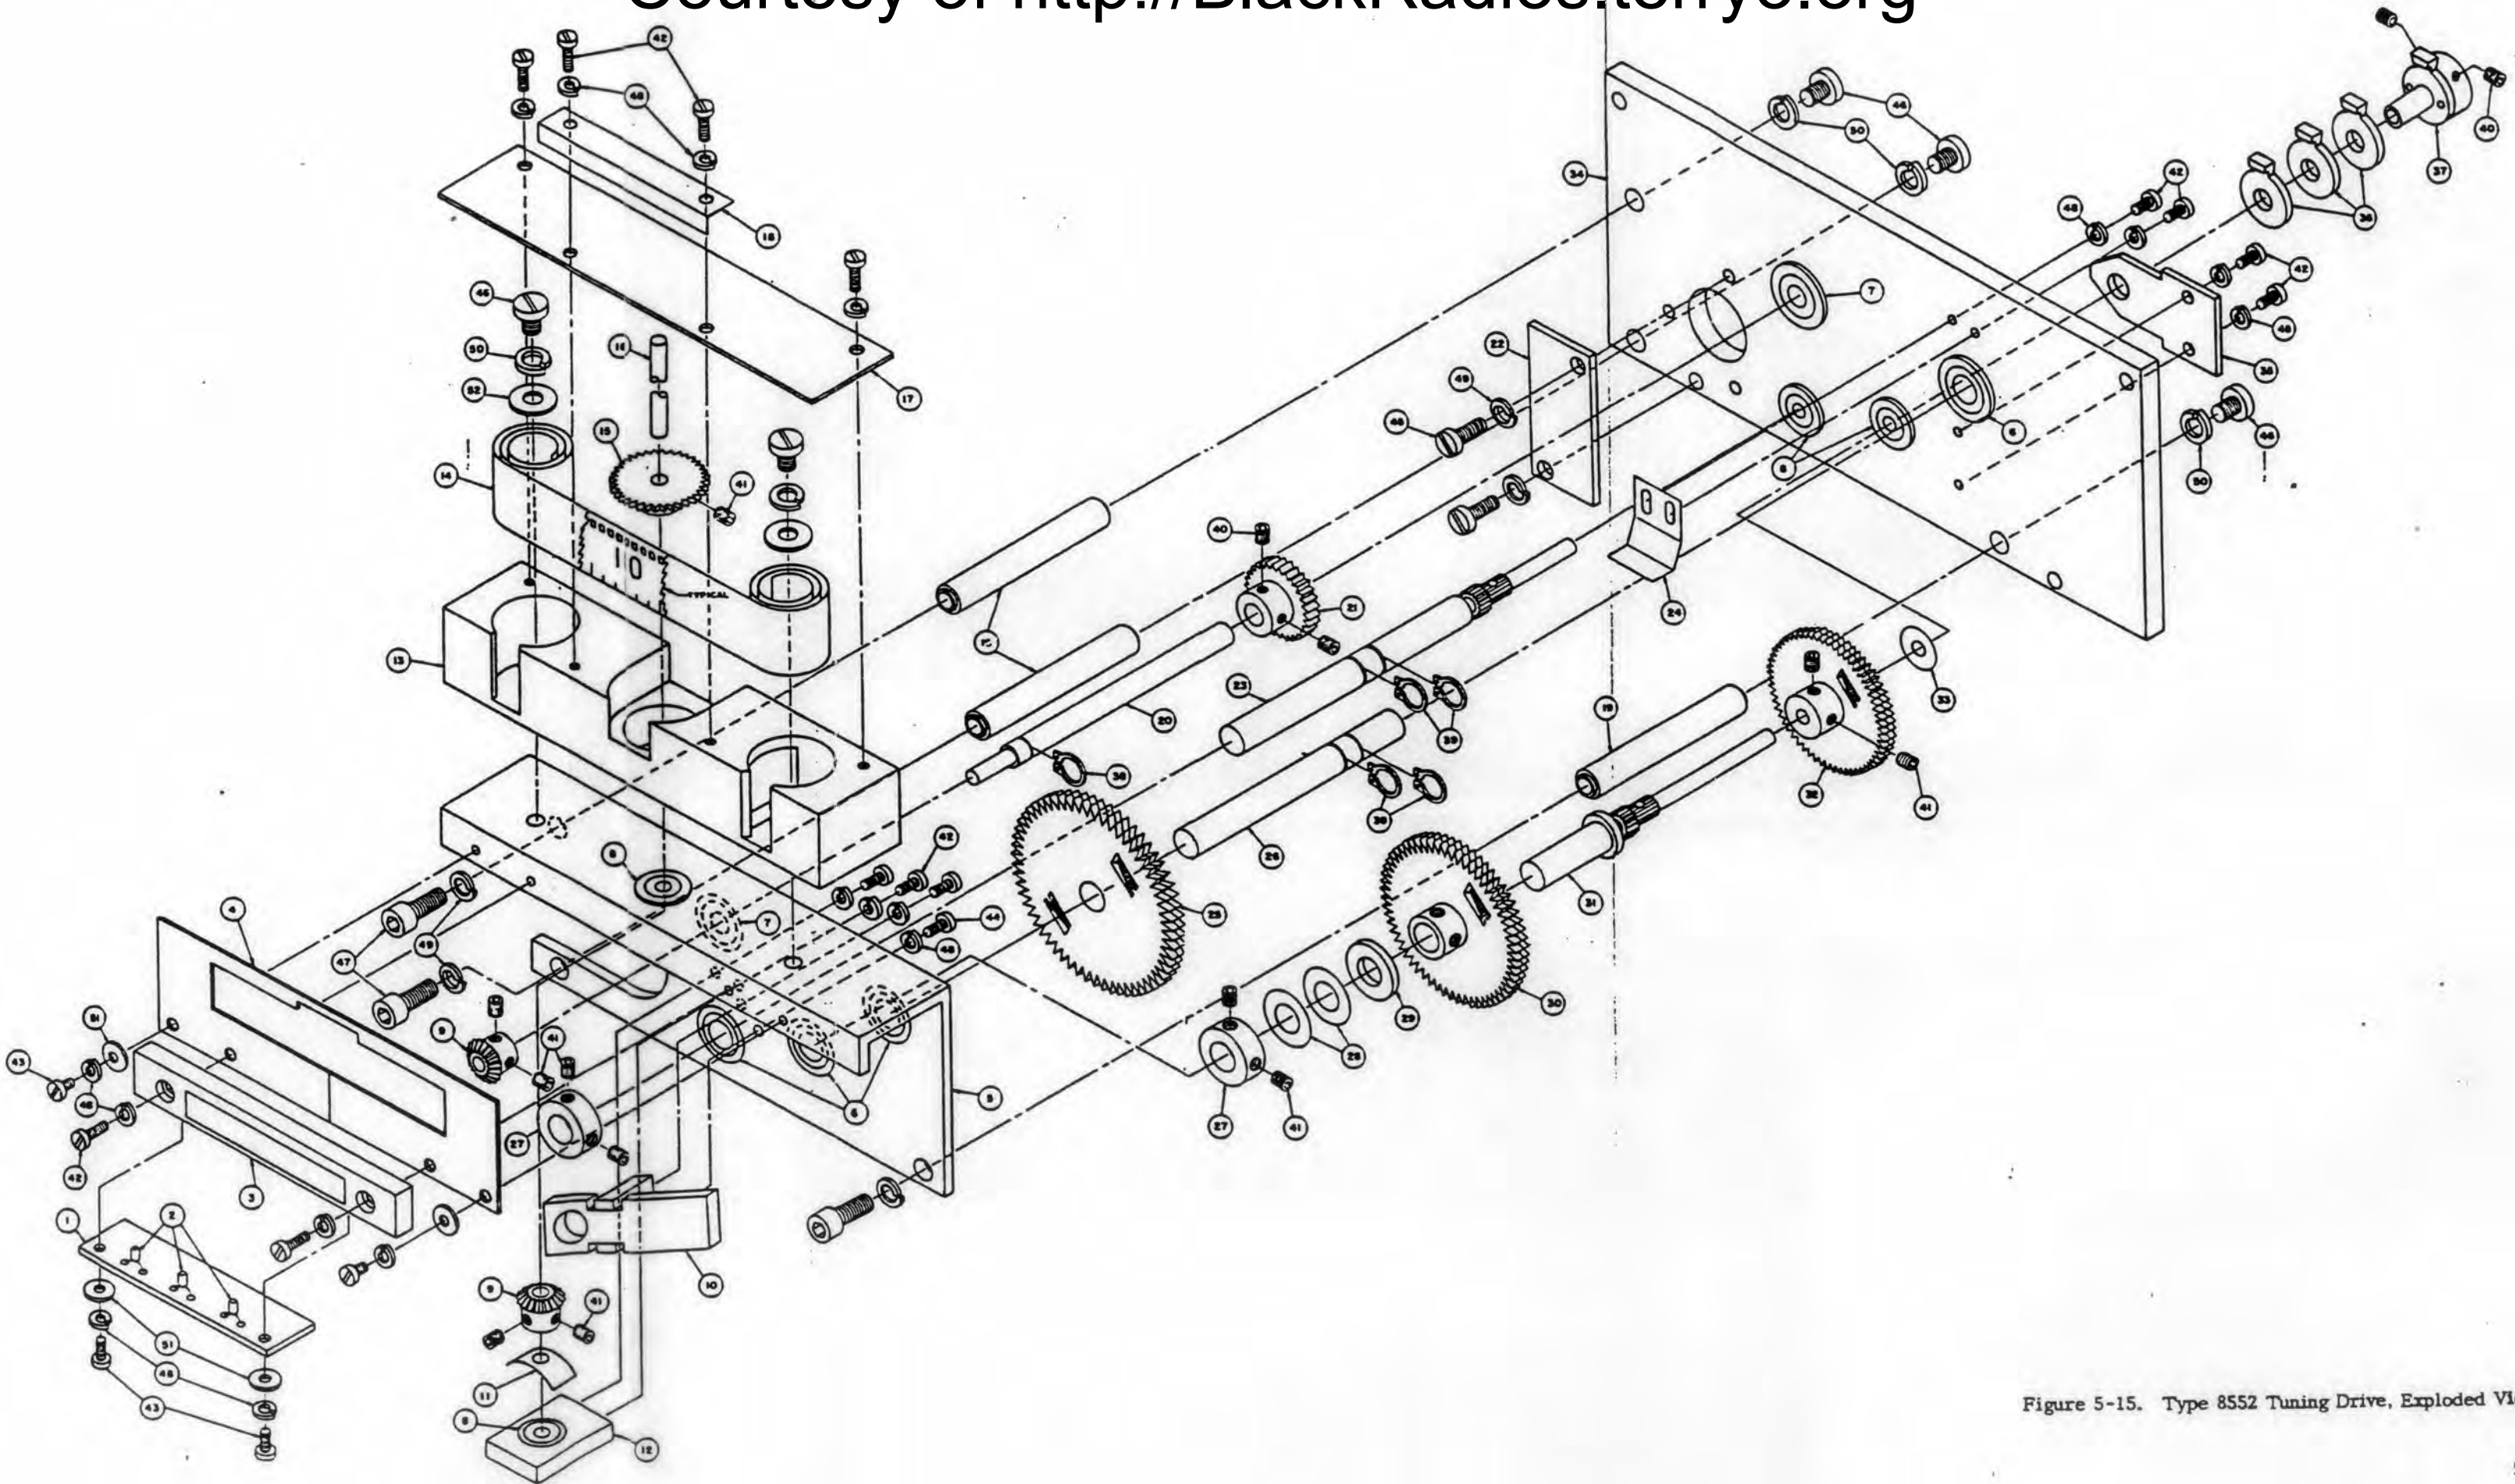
Type 8552 Tuning Drive, Exploded View
